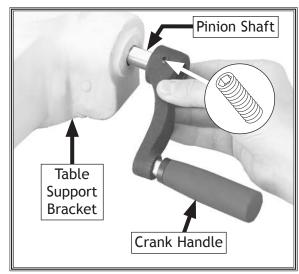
Aligning crank handle set screw with flat on pinion shaft.
